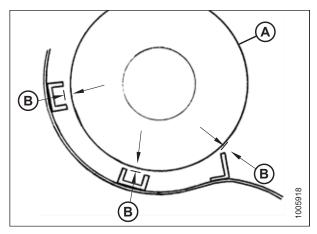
Clearance between Auger and Stripper Bars on the Auger Pan
